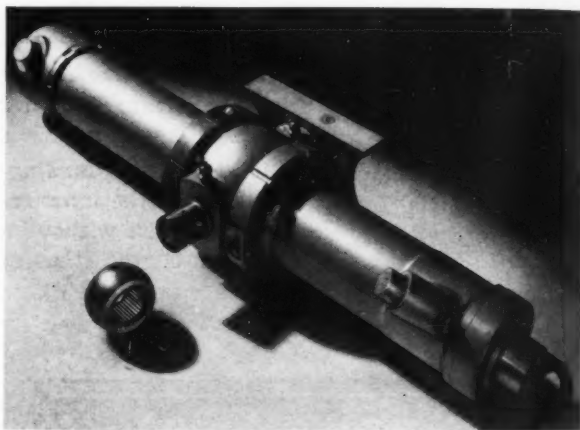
Needle bearings lend compactness to retractable landing gear hydraulic cylinder assembly
